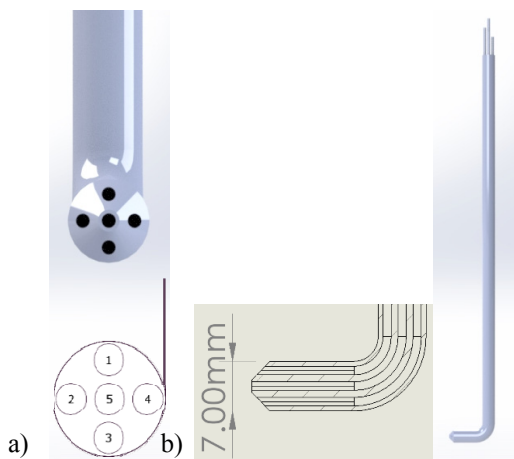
Schematic of the 5-hole probe. a) Front view, b) side view
